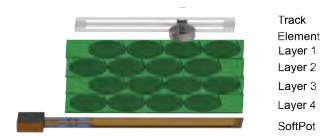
Exploded view of the PCB micro-coil system, consisting of a RTME, a linear track, flexible circuit layers containing interleaved electromagnetic coils, and a soft potentiometer.
